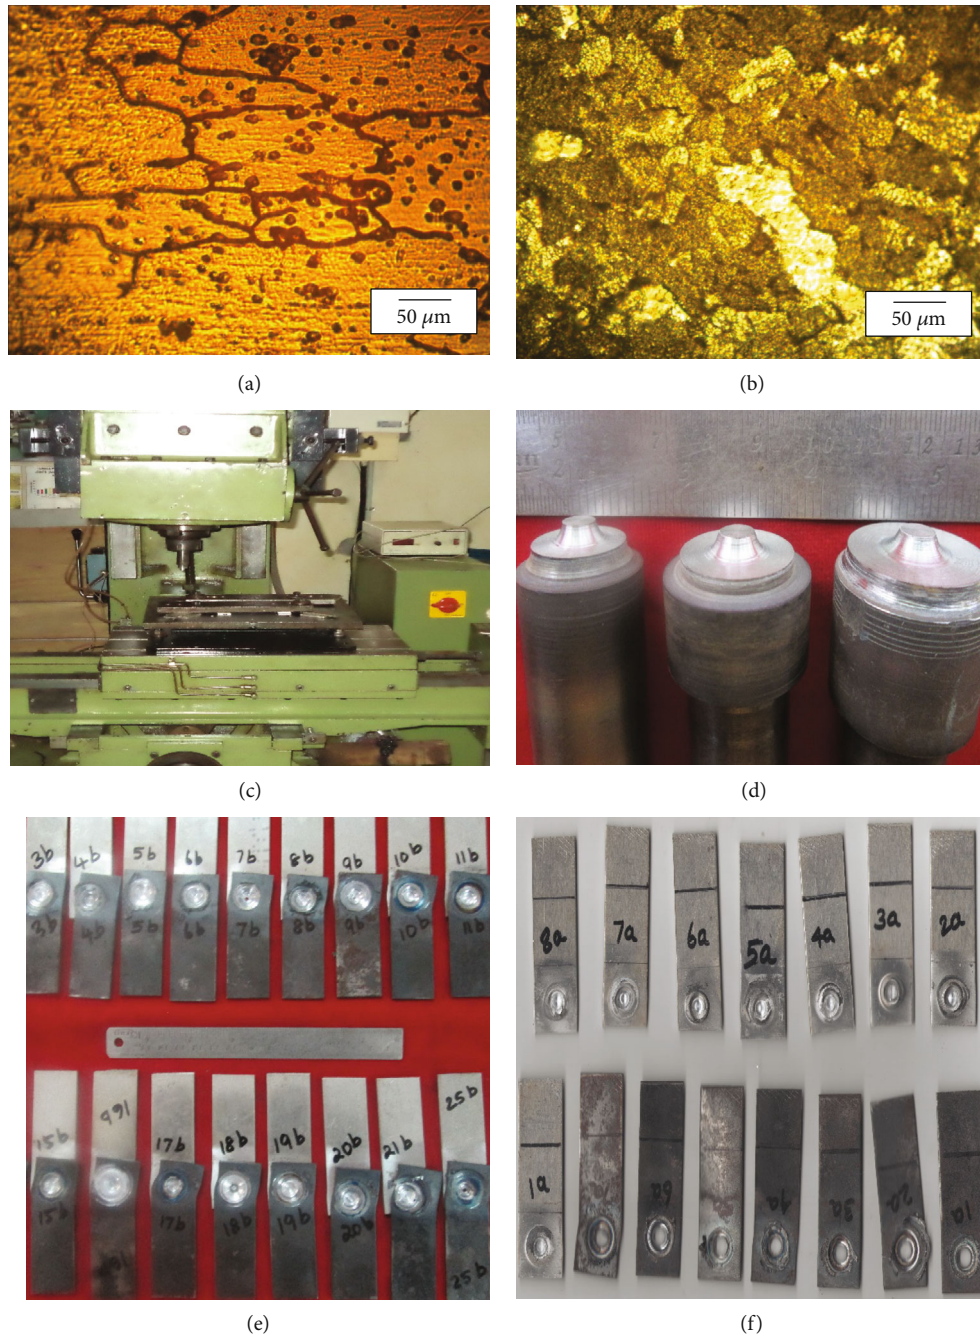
Optical micrograph of (a) AA7075 and (b) HCS; photograph of (c) FSW machine, (d) fabricated tool, (e) fabricated joints (before the test), and (f) fabricated joints after the test.
